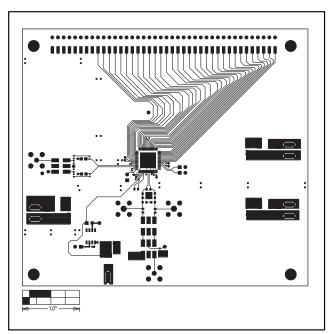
MAX5888 EV Kit PC Board Layout—Component Side
